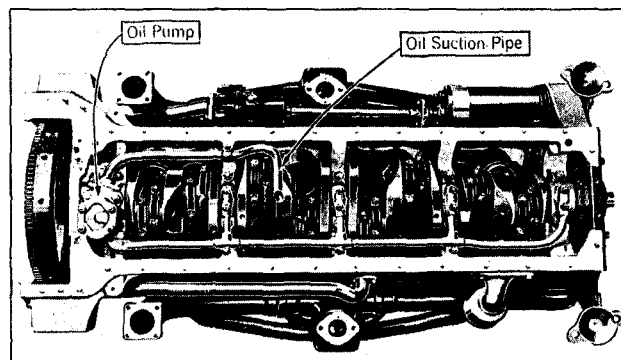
The crankshaft has eight throws and five main bearings.
